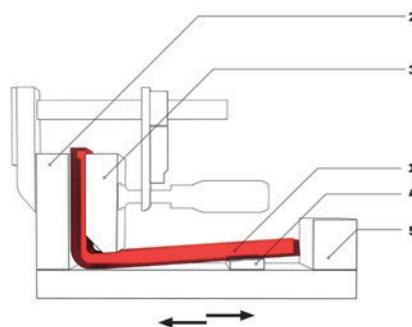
Possibilities of correcting the bending angle: PLEXIGLAS® (1), bending jig (2); block beveled at its lower end (3), movable angle-adjustment device (4), stop (5).
